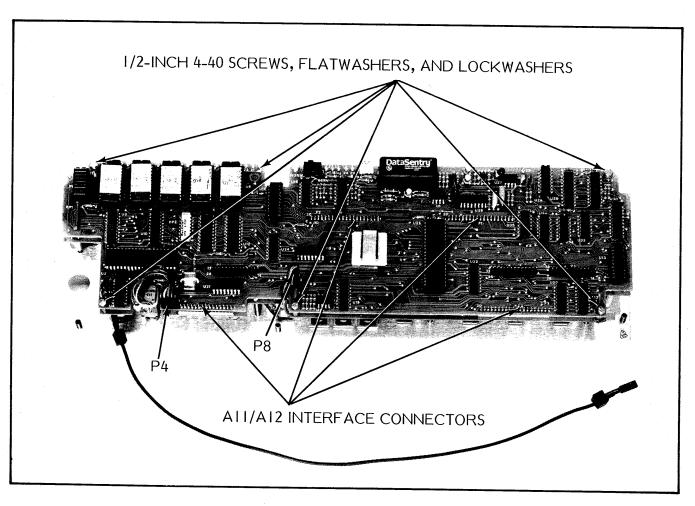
6600A Series Programmable Sweep Generator, Front Panel Assembly
